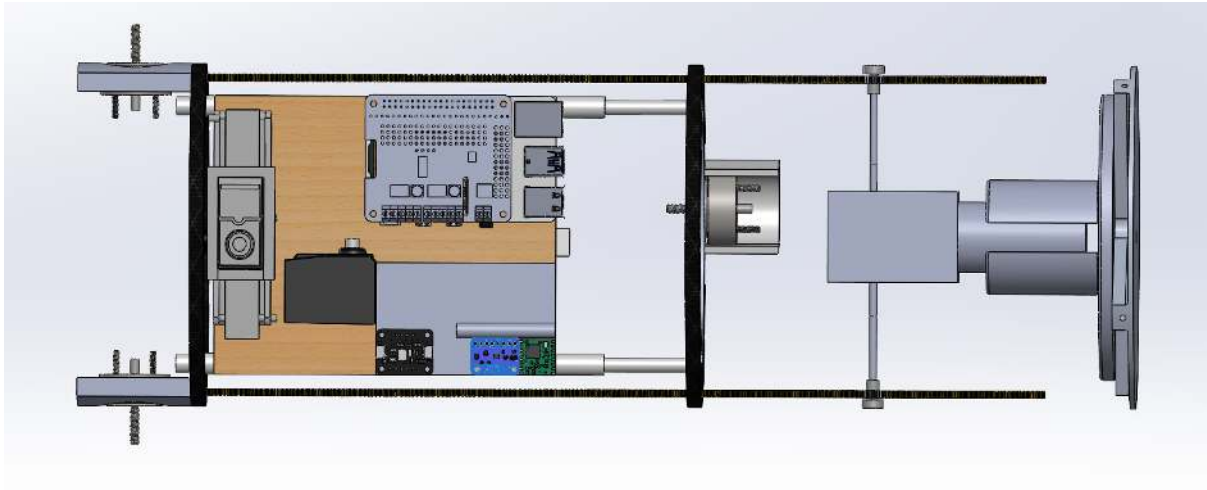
Top View of Payload Component Layout. The nosecone side is on the left and the forward body tube side is on the right.
